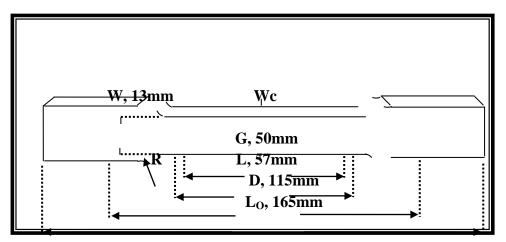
Dimensions of Tensile Test Specimens [ASTM-D638-84].[5]
